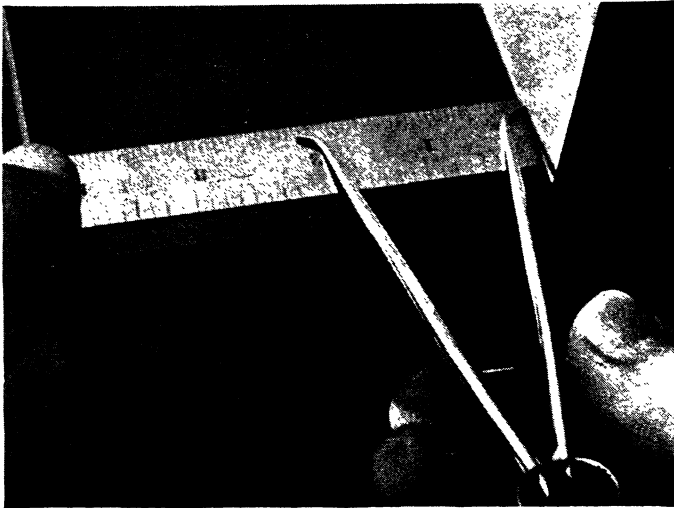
Proper method of reading measurement of inside caliper setting.
